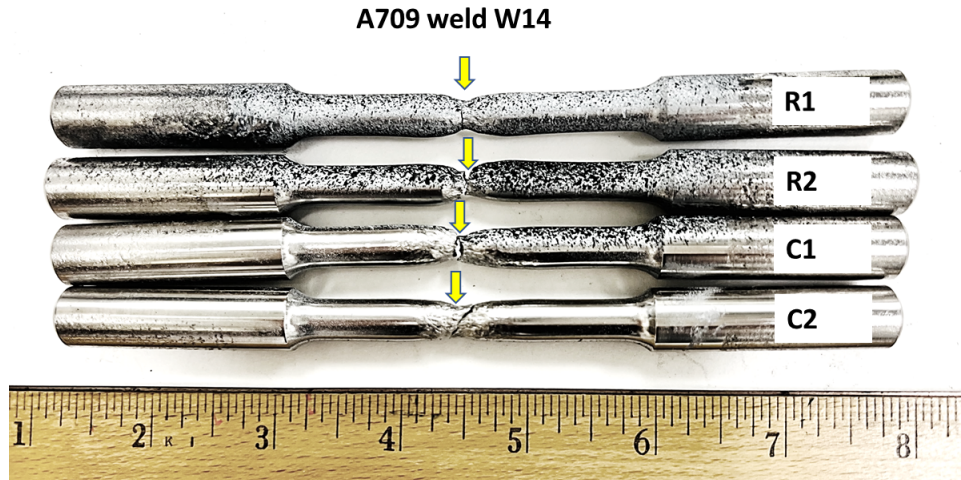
Photograph of the tested cross-weld tensile specimens from production weld W14
